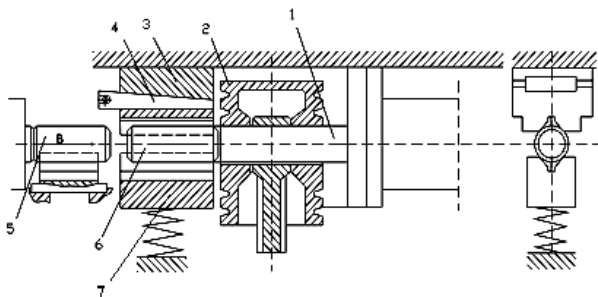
The mounting of the bolt in piston with help a adjustable prism.
